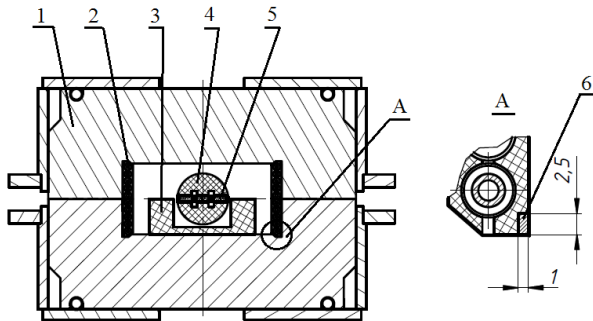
Cross-section of booster dipole with measurements probe inside: 1 – iron yoke, 2 – coil, 3- probe support, 4 – probe rotating part, 5 – rotating coils, 6 – reference coil.
